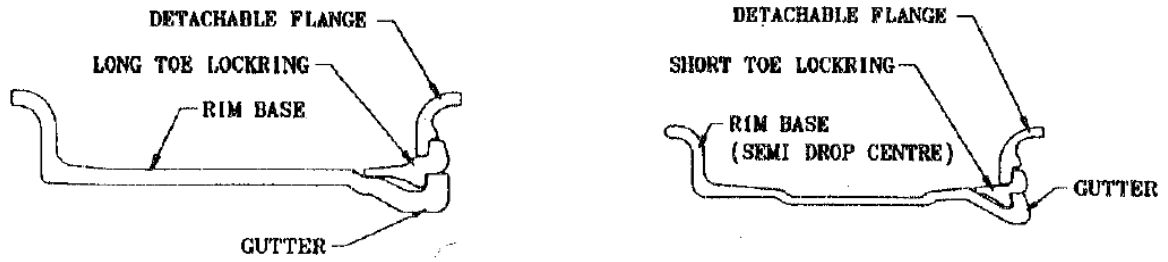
THREE-PIECE RIM NOMENCLATURE
